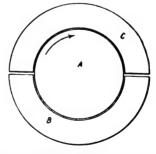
Ordinary sleeve bearing. The axle A slides on the stationary sleeve, B and C.
